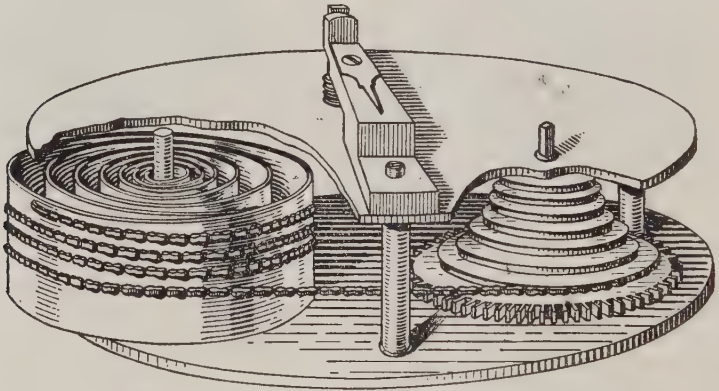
The fusee driving mechanism of a chronometer, comprising main-spring, barrel, chain and fusee. The inner end of the mainspring is secured to a fixed axle.
